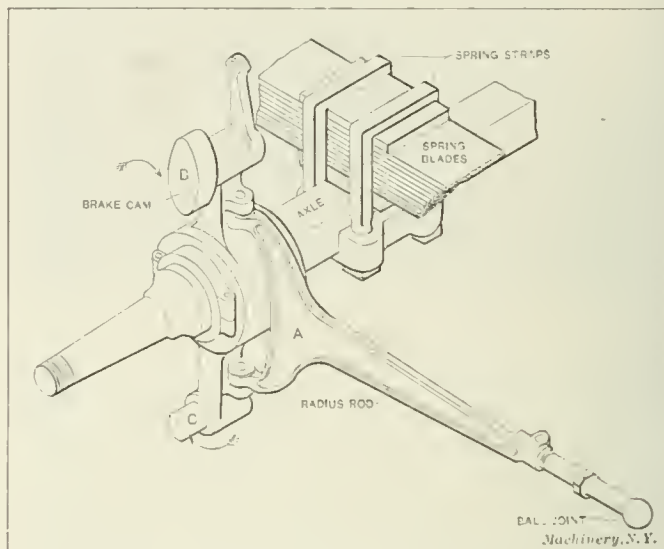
Improved Method of Mounting Expanding Band Brakes
